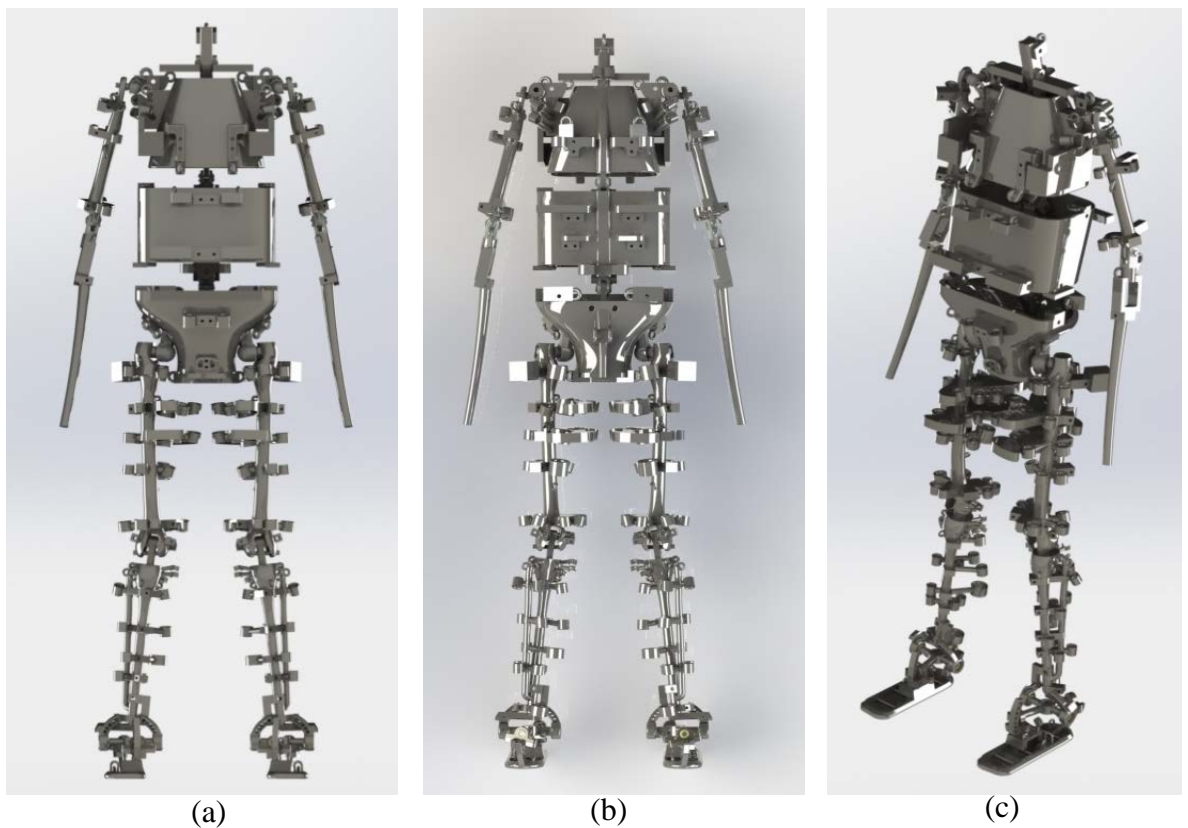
(a) Front, (b) Back and (c) Isometric view of the assembled robot in NX.
